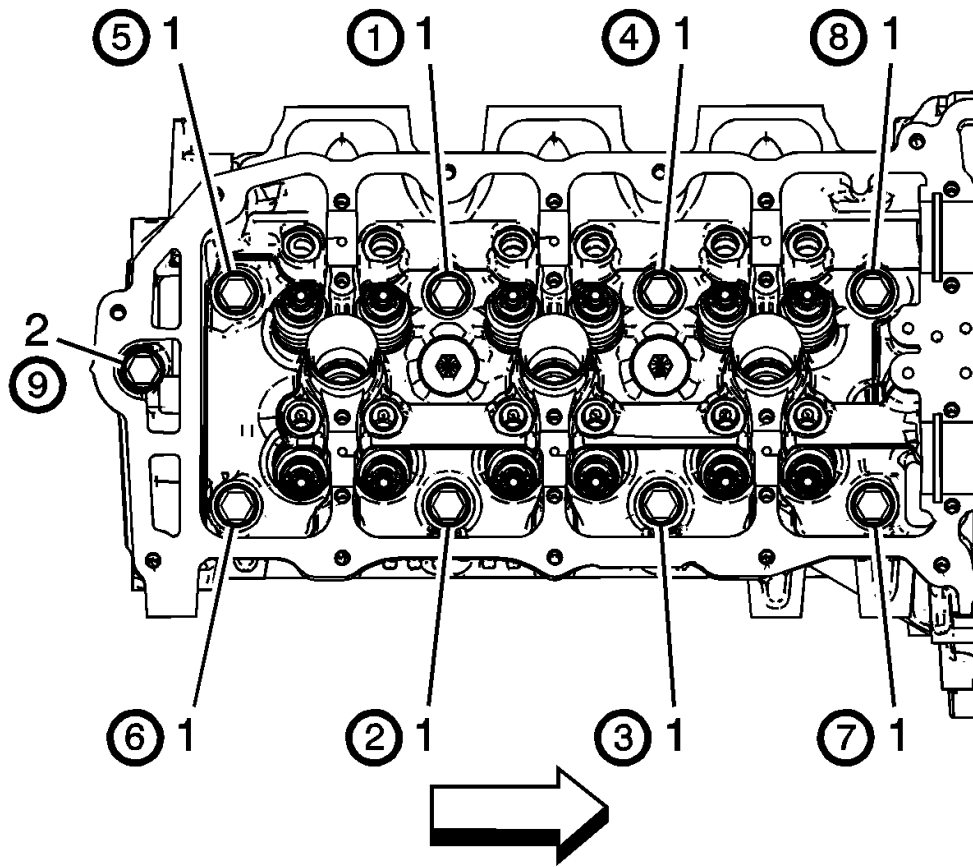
Identifying M11 Cylinder Head Bolt Tightening Sequence
